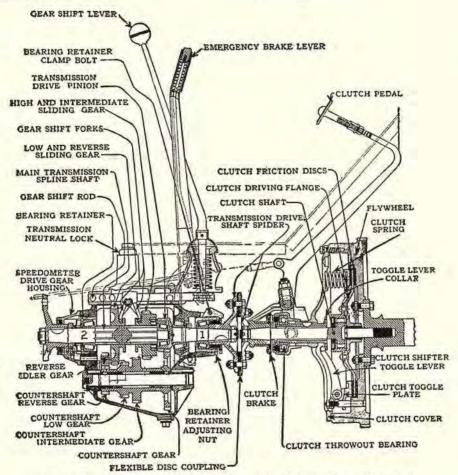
Sectional view of the clutch and transmission of the Studebaker "Light six."
